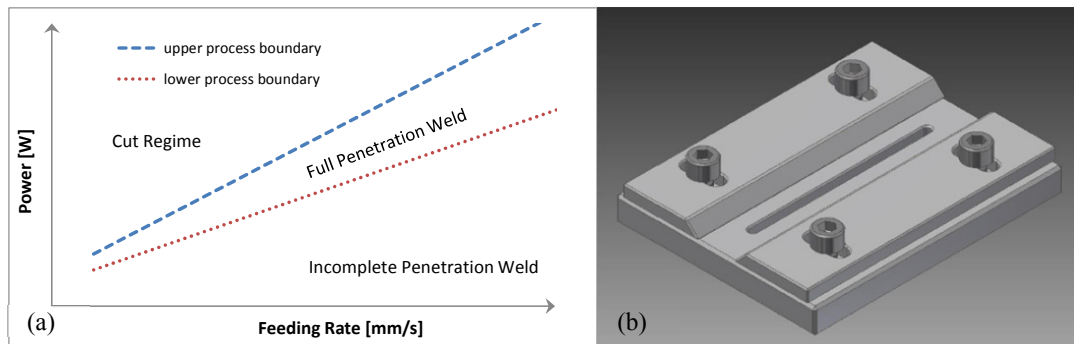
(a) Simplified scheme of welding process boundaries; (b) clamping fixture.
